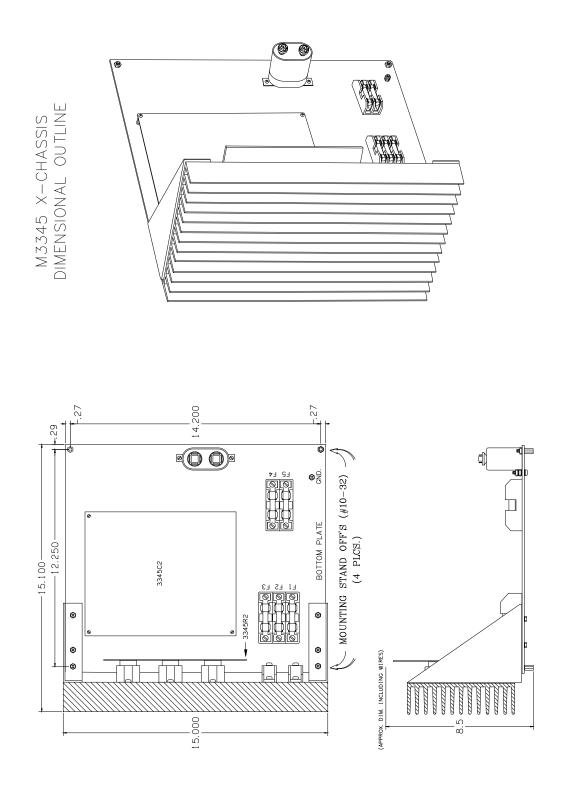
M3345 "X" Chassis Dimensional Outline
